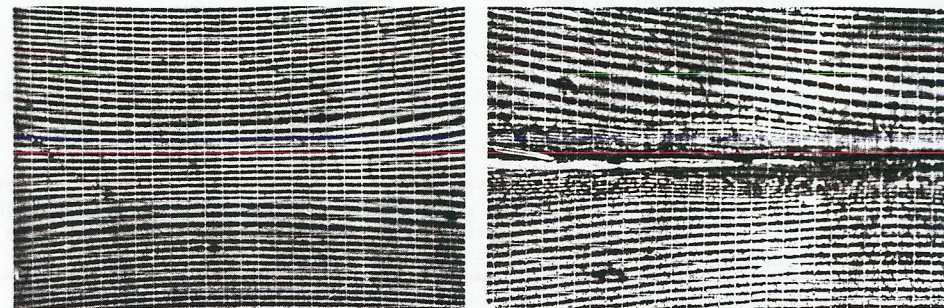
Moiré pictures of weldments with a buried defect.
